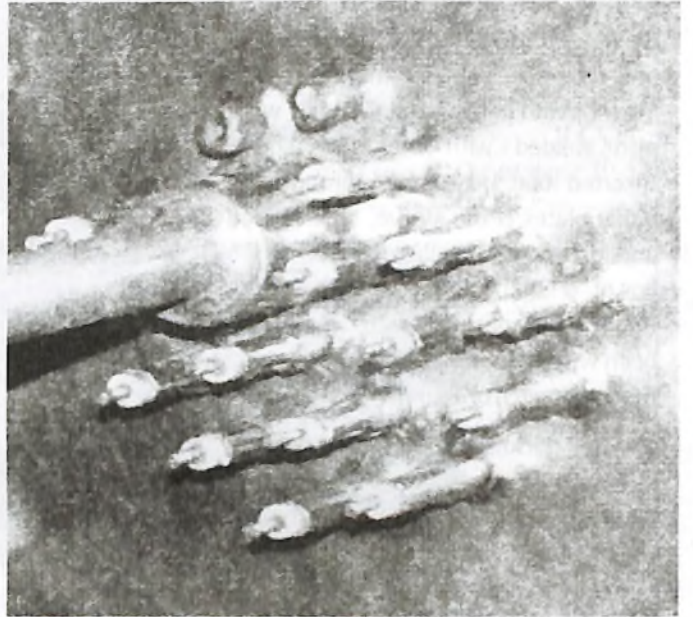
Heater Pins welded with flange (tube sheet) and DP checked
